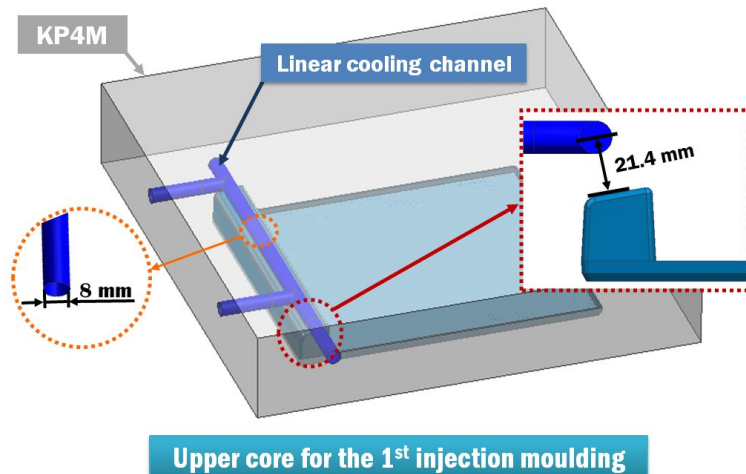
Design of injection mould with linear cooling channel for flat plate with a partly large volume
